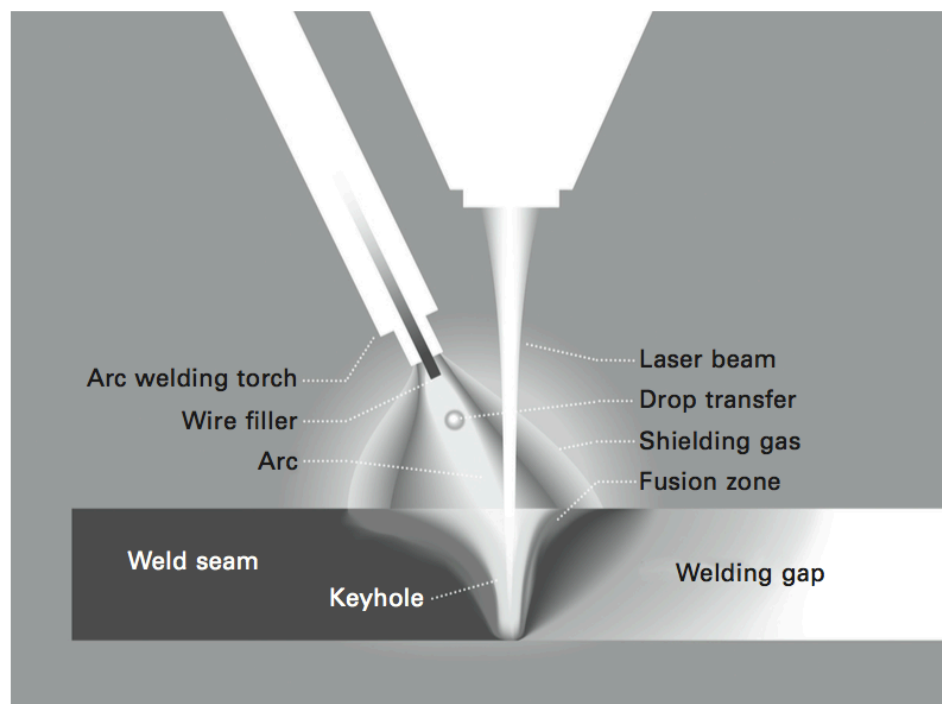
Principle of laser hybrid welding (44, p. 98)
